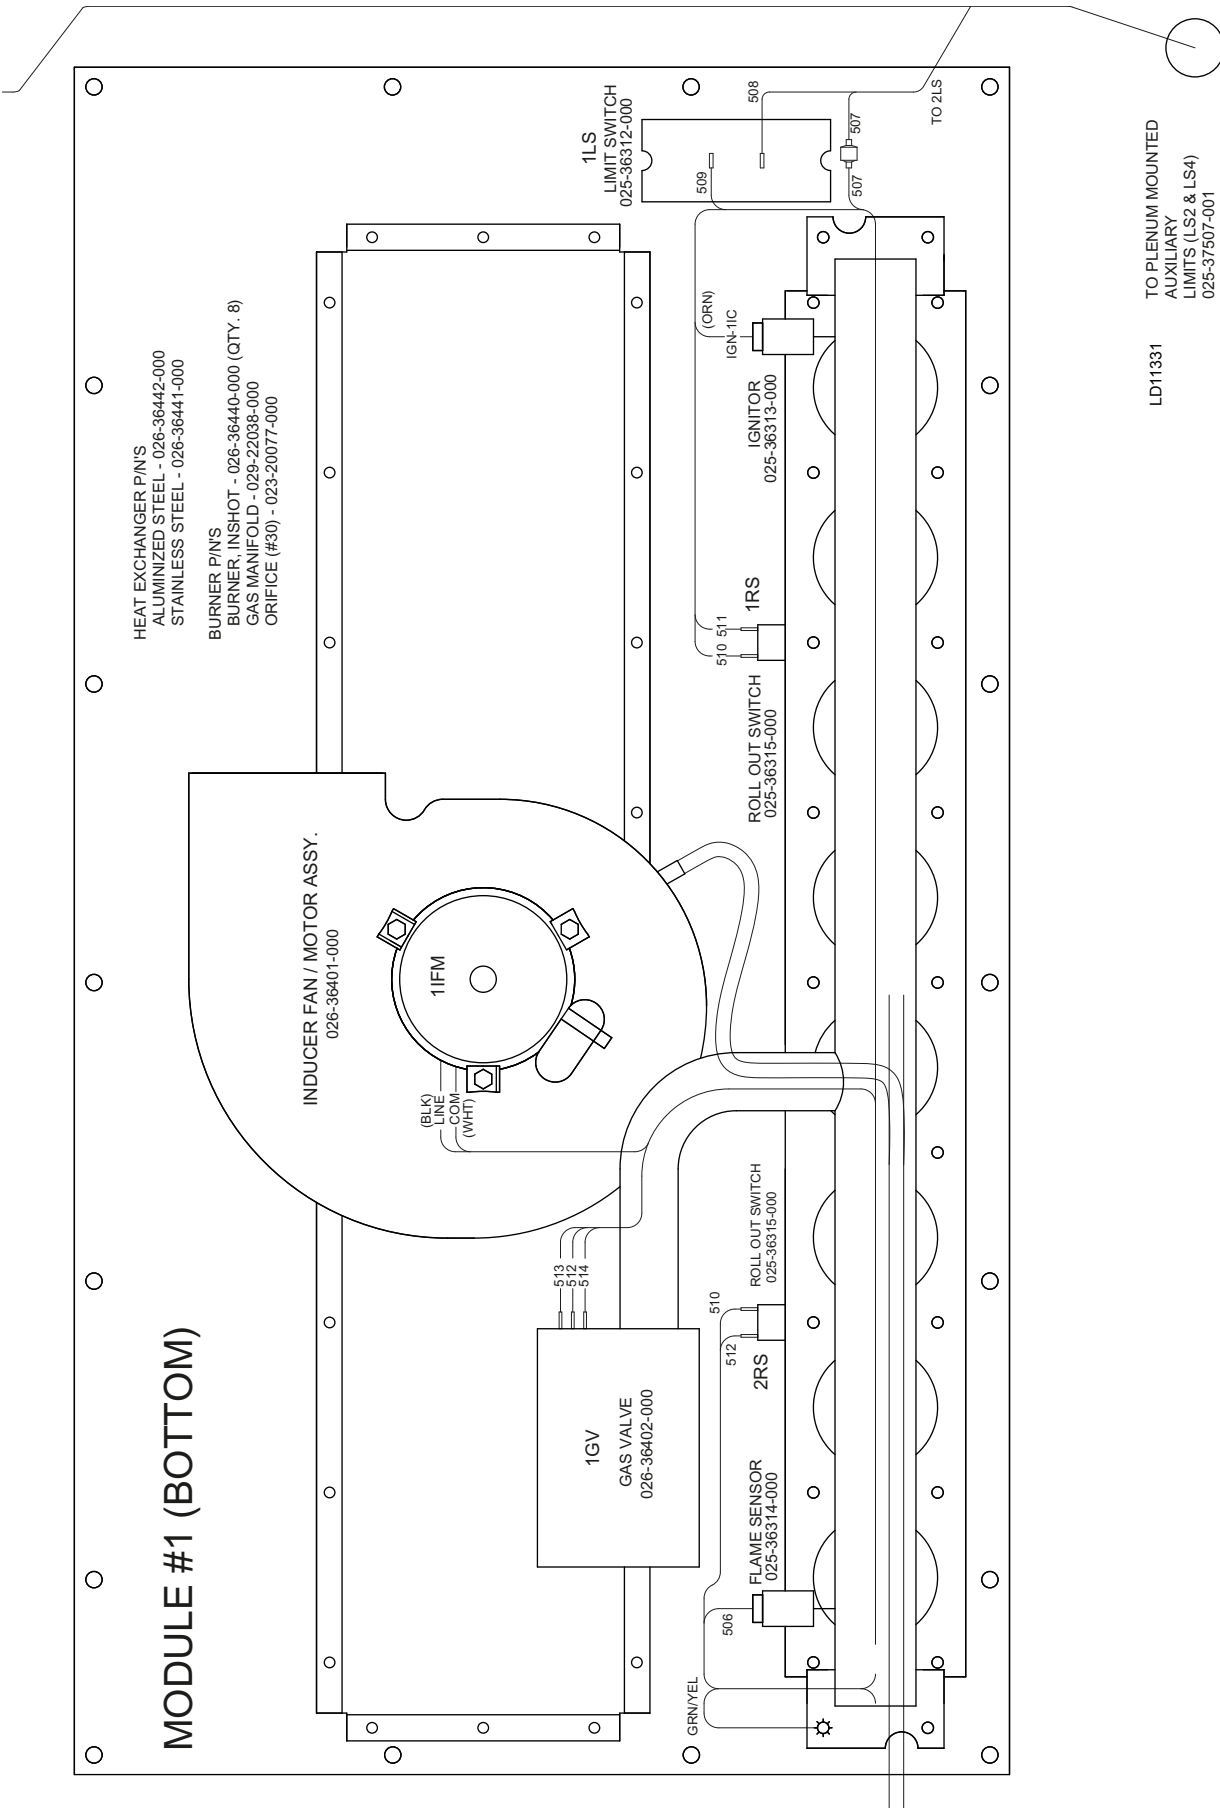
YPAL, 50-65 TON, STAGED GAS HEAT (ENLARGED VIEW #4)
